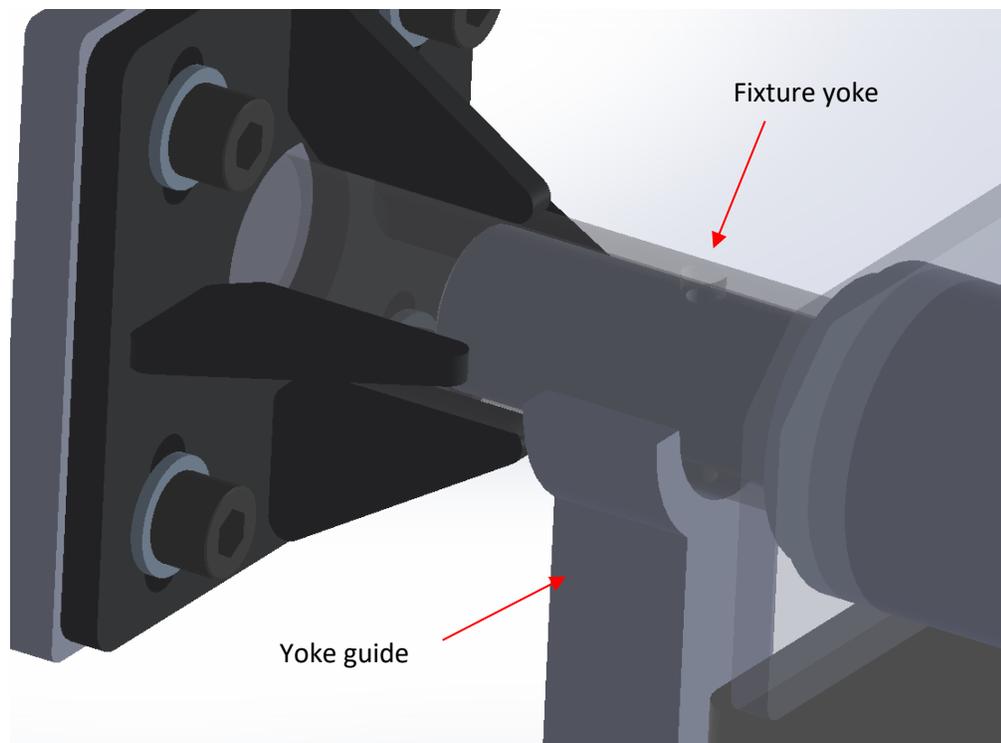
Coupling of the Fixture Yoke and Yoke guide in Idle End Design Iteration #1
